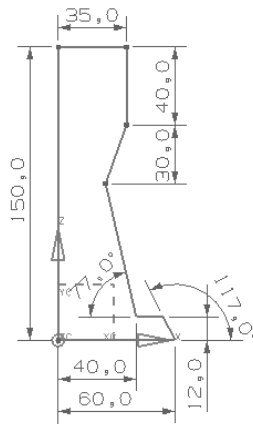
The completed sketch displayed after adding the required constraints and dimensions
